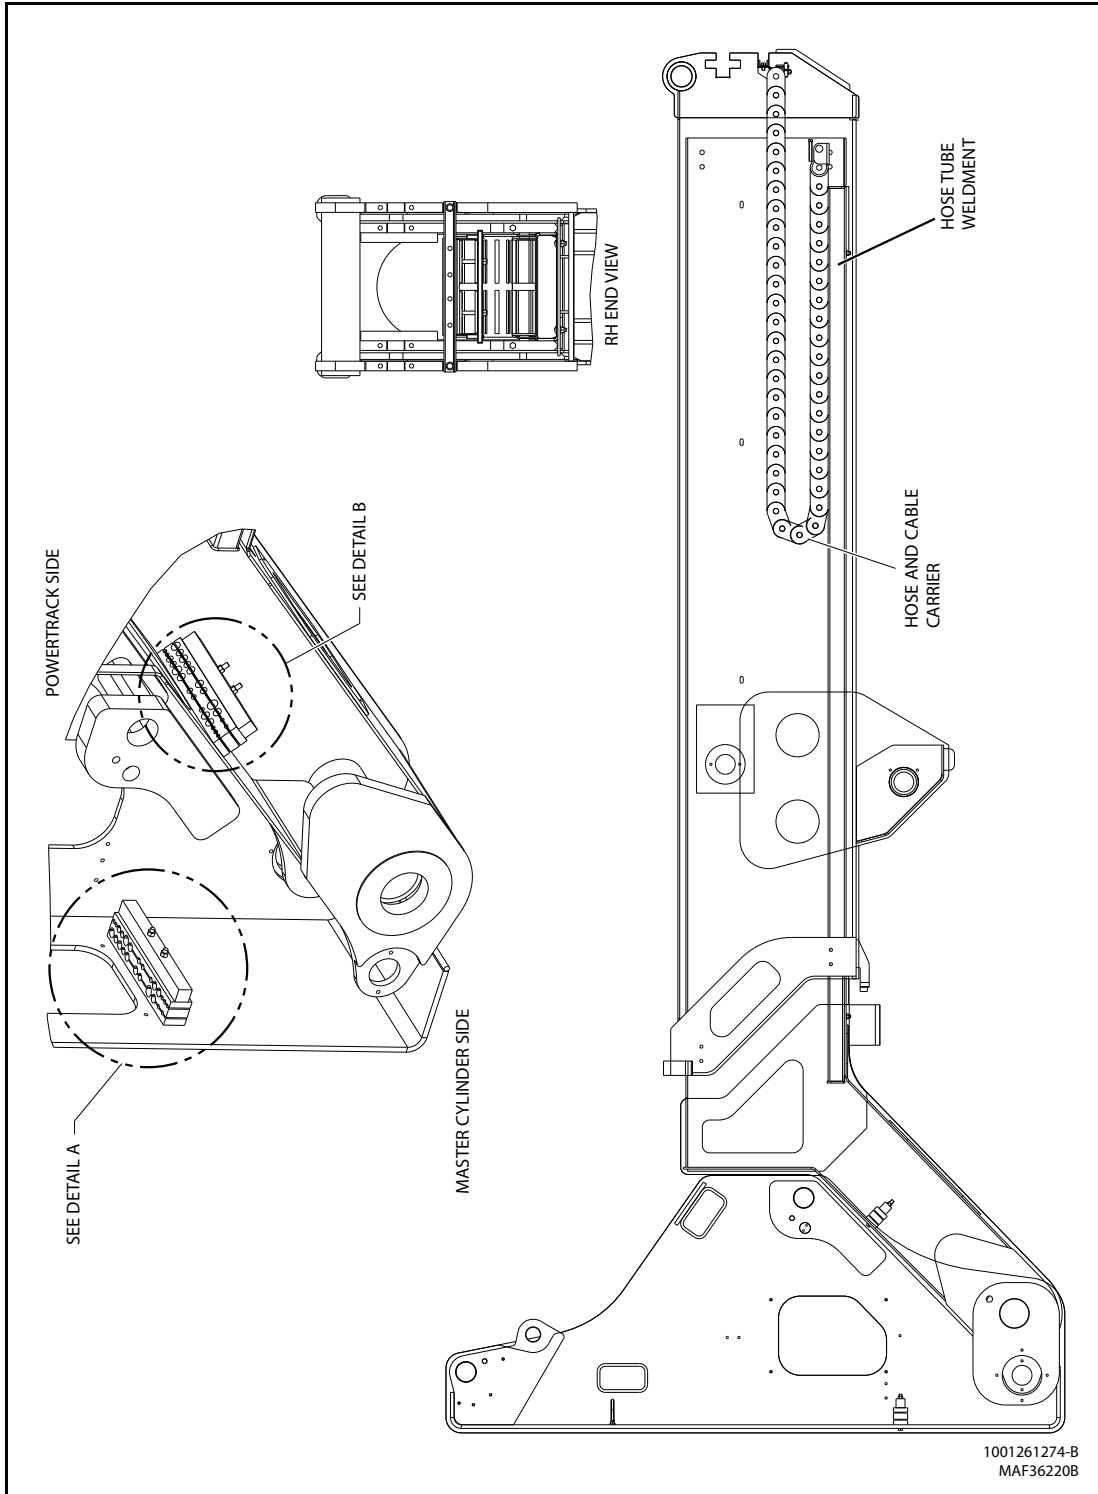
Powertrack Installation Tower Boom - Sheet 1 of 3
